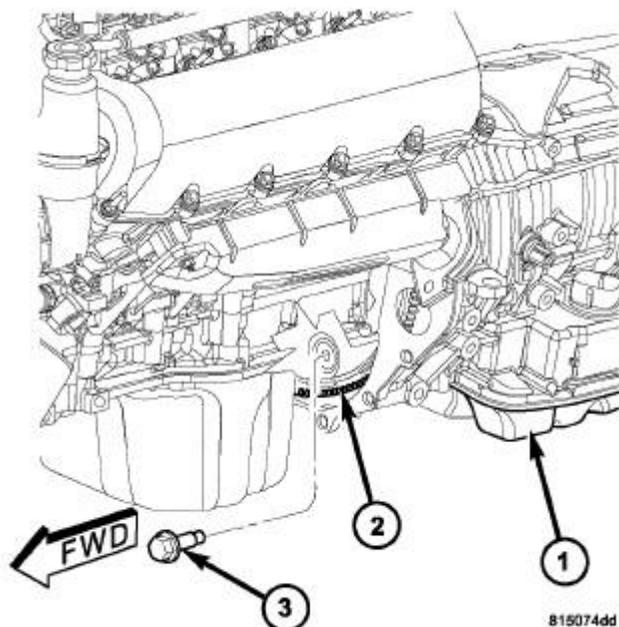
Transmission, Driveplate & Torque Converter Bolts
